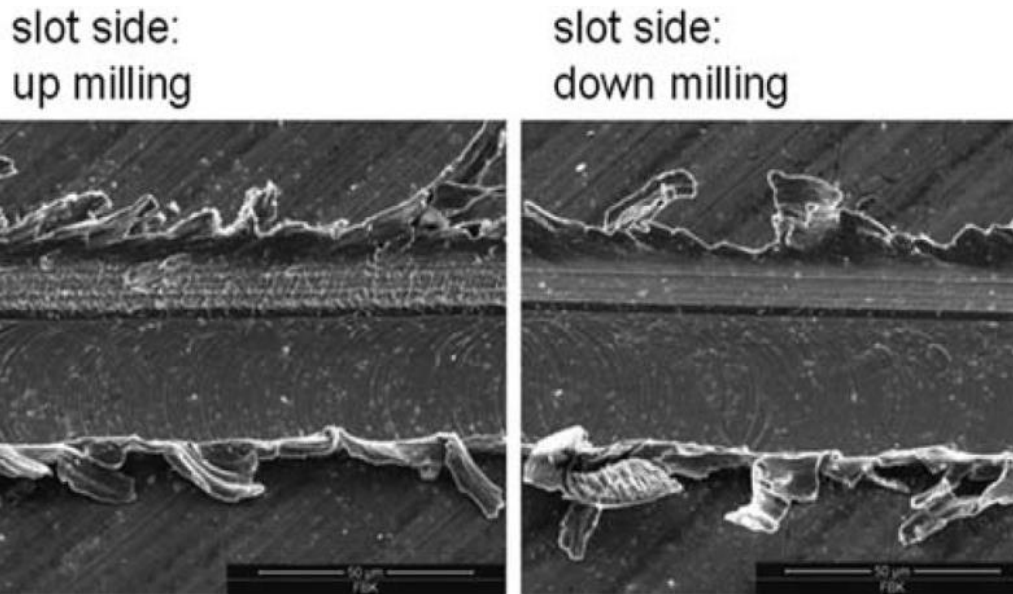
Effect of the Milling Method (Up and Down Milling) on the Burr Formation during Slot Micro Milling of Ti-6Al-7Nb (Axial Depth  $20\mu\text{m}$ ; Tool Diameter  $48\mu\text{m}$ ; Cutting Speed  $9.05\text{ m/min}$ , Chip Load  $0.084\ \mu\text{m/tooth}$ ) [18].
